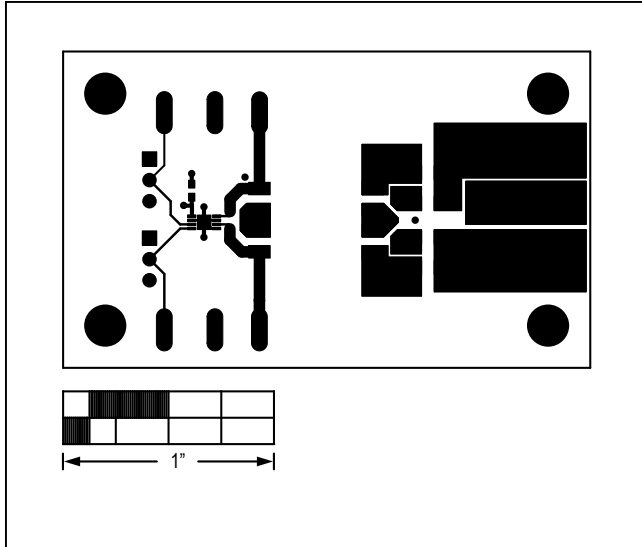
MAX258 EV Kit PCB Layout—Component Side
